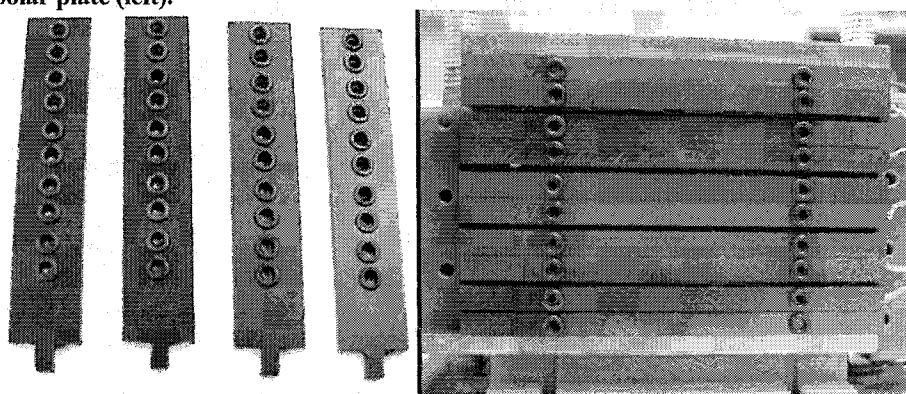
Four alignment inserts (left) were used to position the O-ring seals against the face of the bipolar plates. The sealing pressure was large enough for the seals to remain adhered upon disassembly (right).
